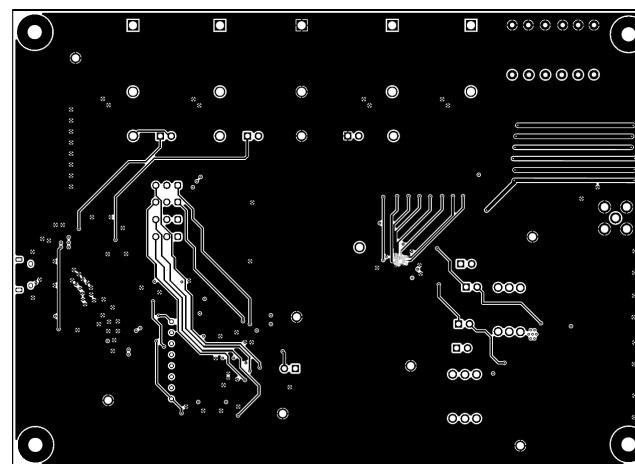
AMC8V208EVM PCB Mid Layer 2 Layout (Signal Layer)
